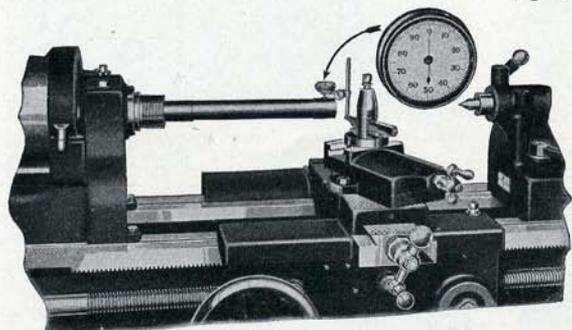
Testing the Accuracy of Alignment of the 9-inch Junior Headstock Spindle with a Dial Test Indicator
